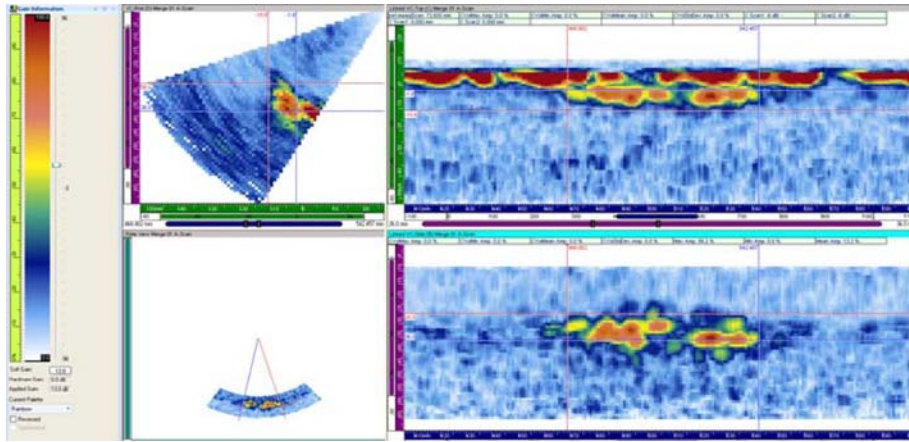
Specimen 9C-034 Flaw 4 After Weld Crown Removal at 1.5 MHz, Line Scan Data
